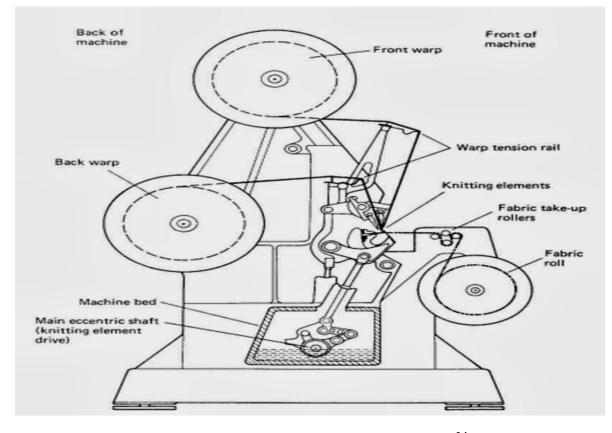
Cross-section of a bearded needle tricot machine <sup>24</sup>.
